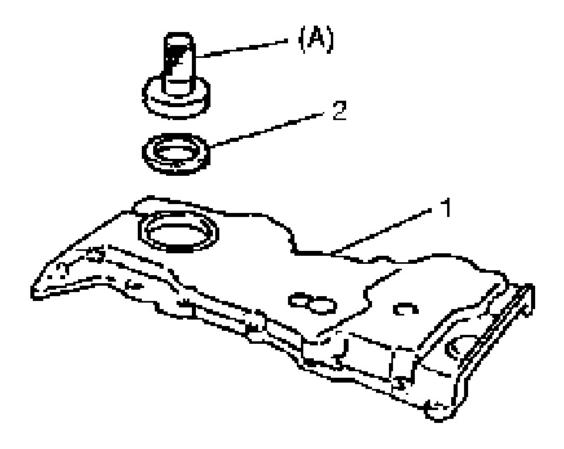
Installing Oil Seal Lip Courtesy of SUZUKI OF AMERICA CORP.
